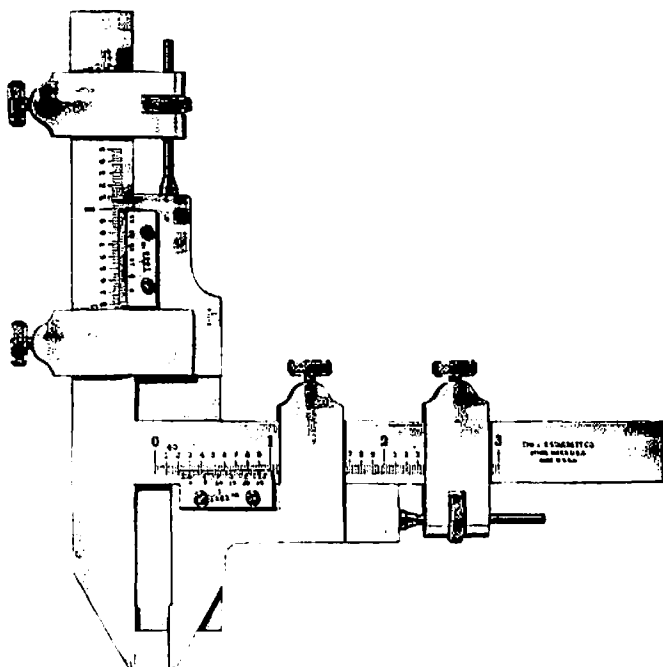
Gear tooth caliper (Courtesy L. S. Starrett Co.)
